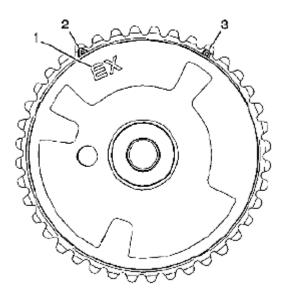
Identifying Left Exhaust Camshaft Position Actuator And Bolt Courtesy of SUZUKI OF AMERICA CORP.
